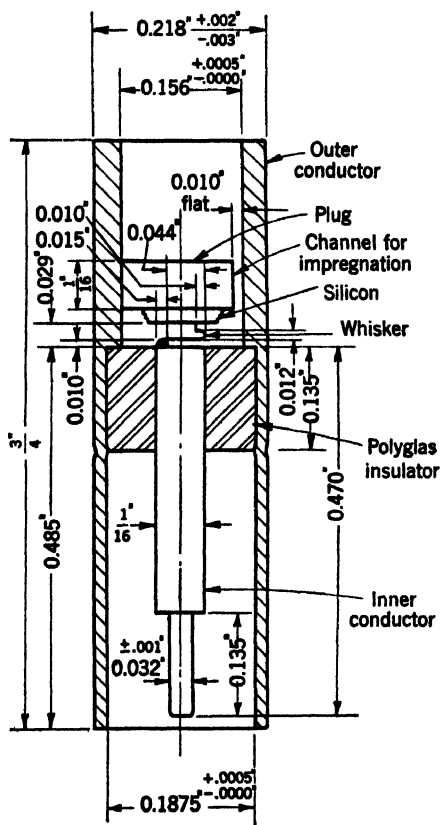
Cross section of the Radiation Laboratory coaxial cartridge showing the dimensions of the parts.
